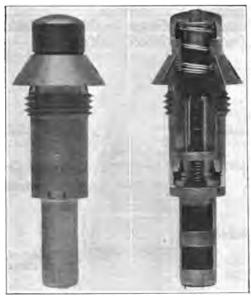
Mark V point detonating fuze, exterior view and section.
